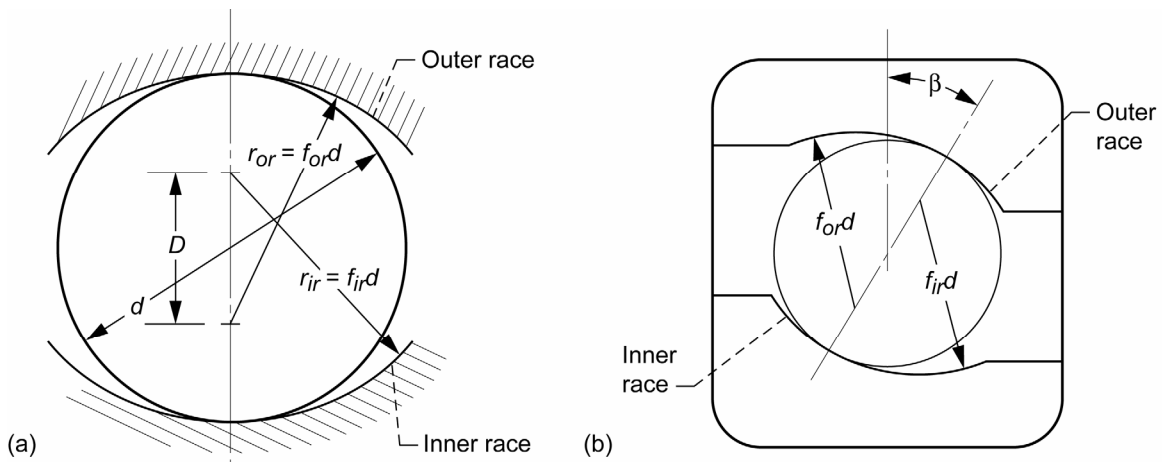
Ball-race conformity. (a) Deep-groove ball bearing. (b) Angular-contact ball bearing.
